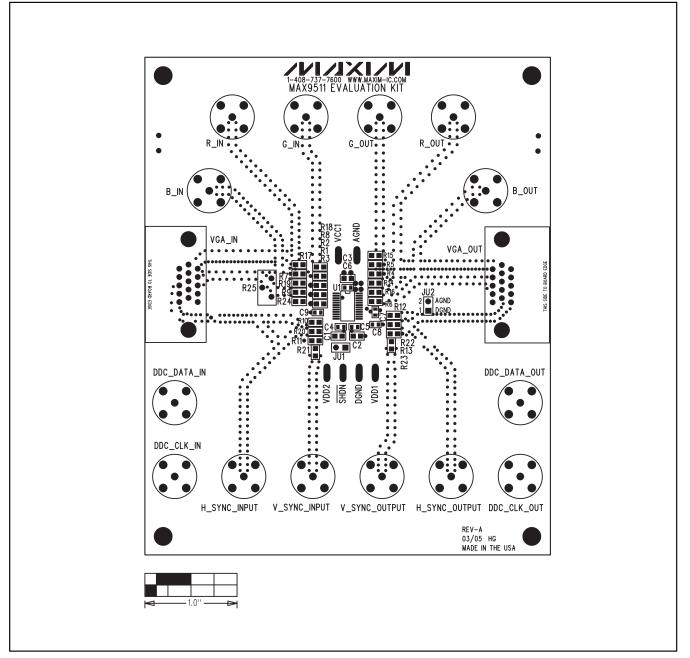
MAX9511 EV Kit Component Placement Guide—Component Side
